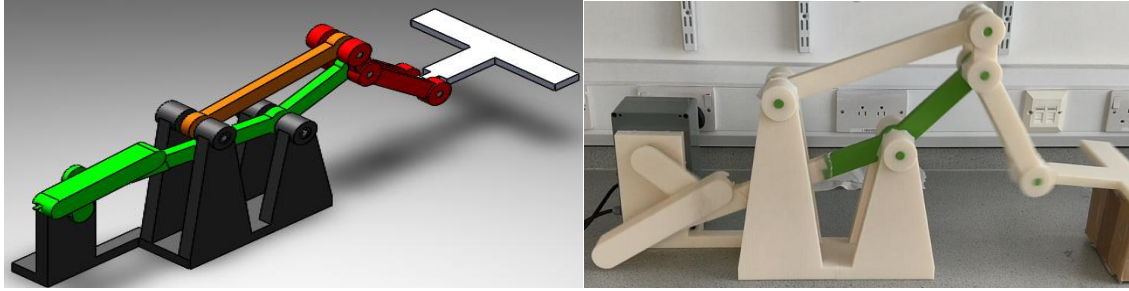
The experimental setup for the plate-on-plate type reciprocating wear setup. (a) Simulated CAD model and (b) 3D printed assembly of the test-rig.
